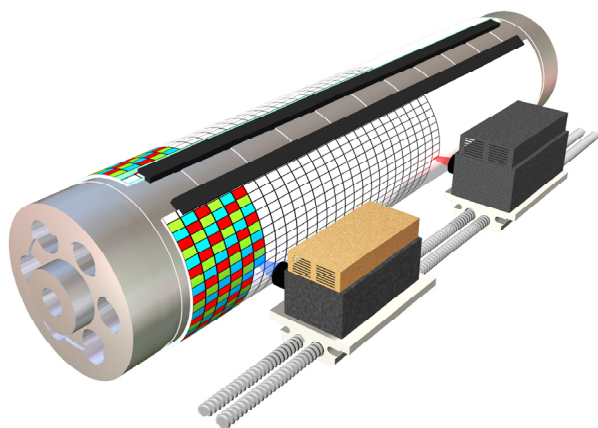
Extremely compact machine design combining thermal laser direct imaging with inkjet
